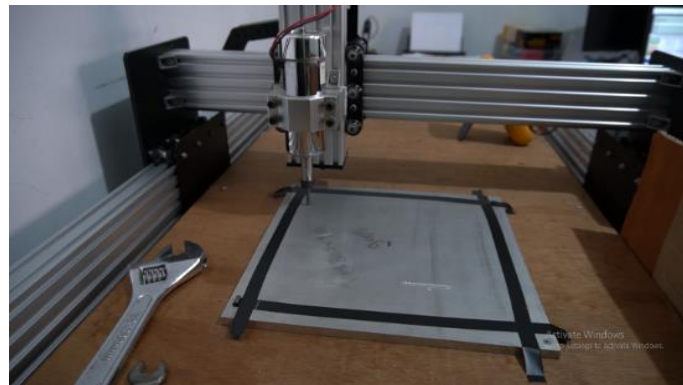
Mini Mach3 500 watt CNC Milling Machine
